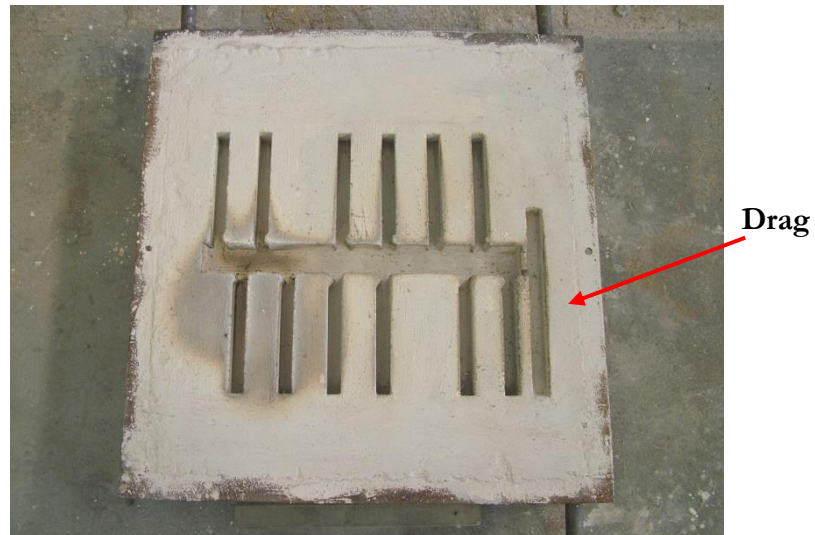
Photograph of the drag used for sand casting rectangular shaped wear test bars.
